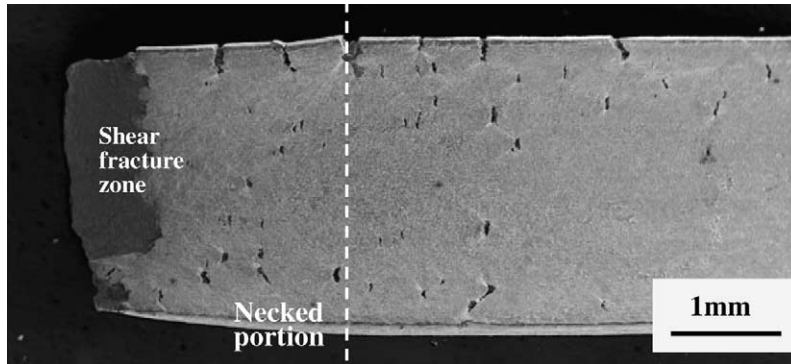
A concave side appearance of the gauge section for the fractured specimen.
